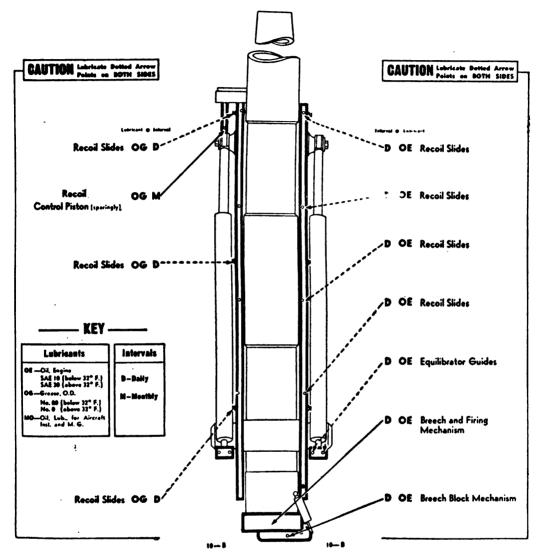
155-mm gun M1 and M1A1—lubrication guide.
